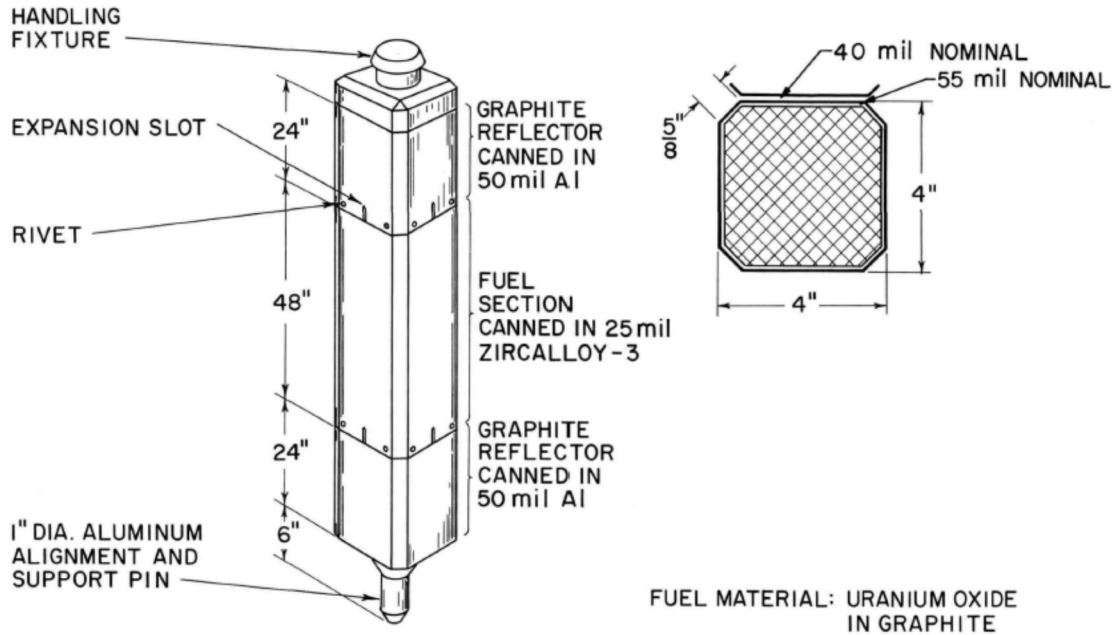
TREAT Original Core Fuel Element Regular Assembly.
